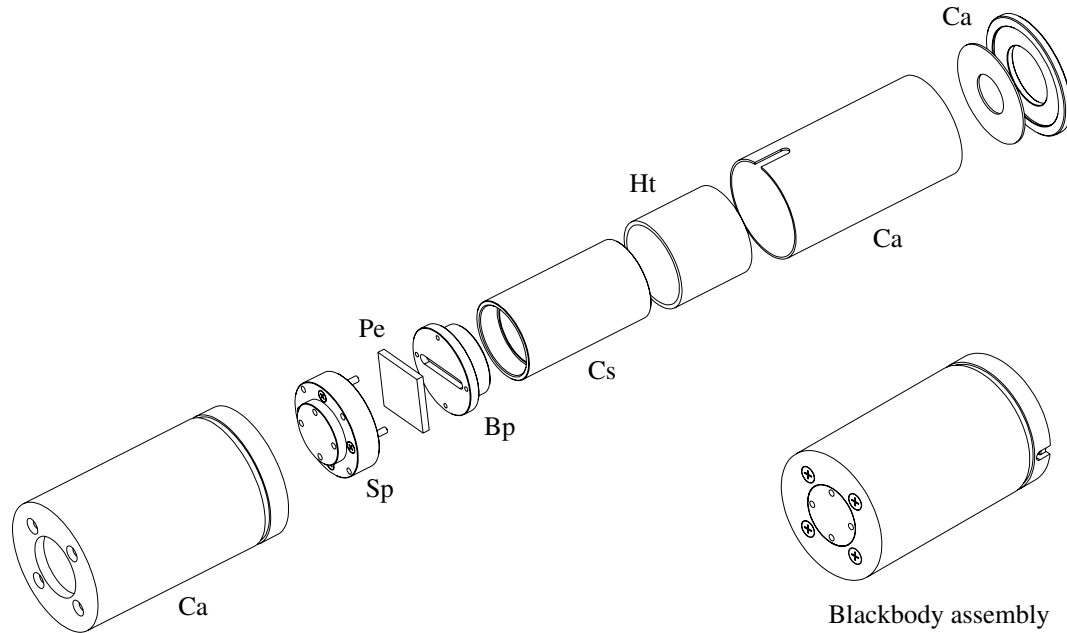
Exploded view of the blackbody source (focused beam version). Bp: blackbody bottom, Cs: blackbody cylindrical shield, Sp: support, Pe: Peltier element, Ca: external casing, Ht: heater.
